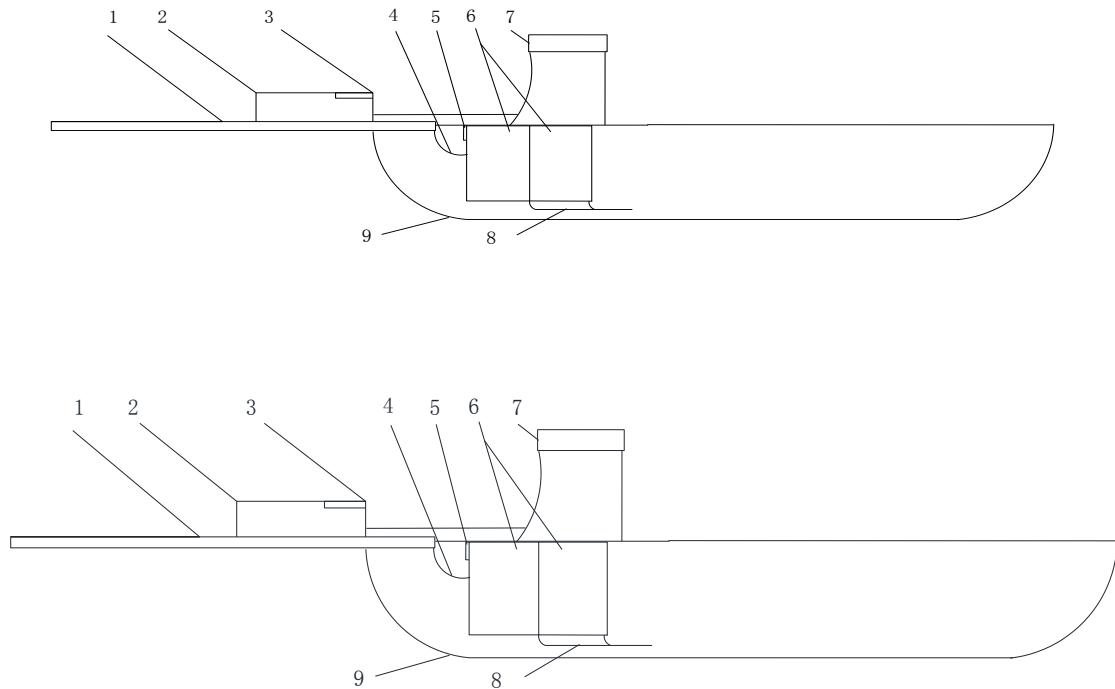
The Design Sketch Map of Collecting Part and Sensors in Collecting Machine
